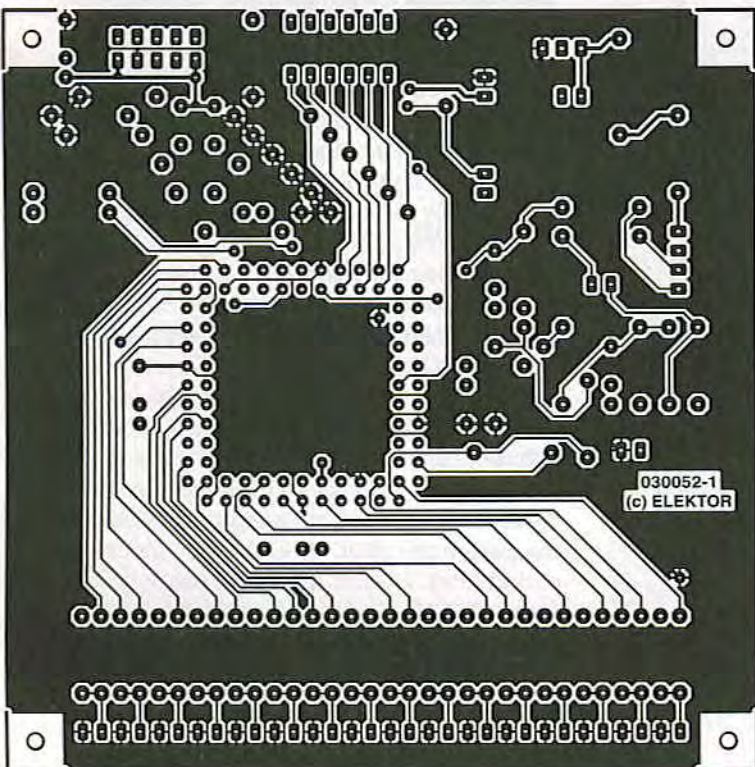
The double-sided PCB layout for the CPLD rev counter.
